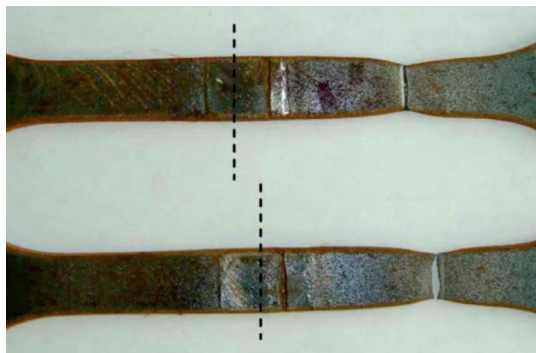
Static drag tests  $v_2=100\text{mm/min}$   $v_1=40\text{mm/min}$  welding FSW-TIG steel S235JR+N
